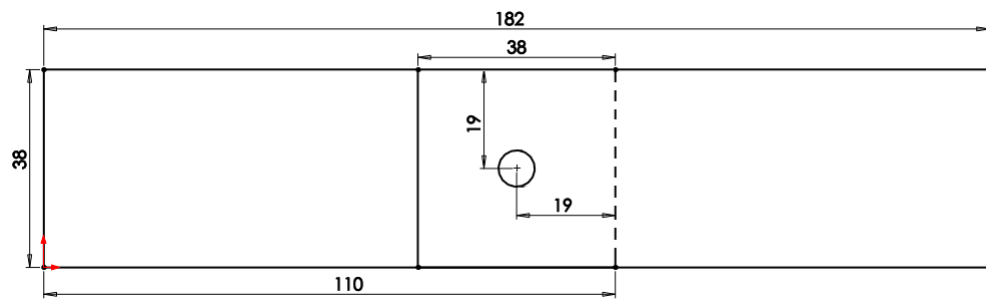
Lap-shear geometry. All dimensions in mm. Taken from [92]
